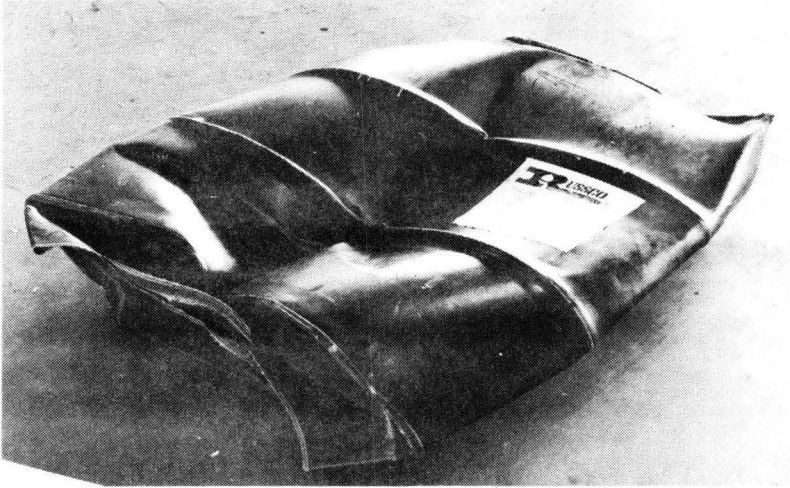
DRUM AFTER 20 INCHES OF CRUSH.
